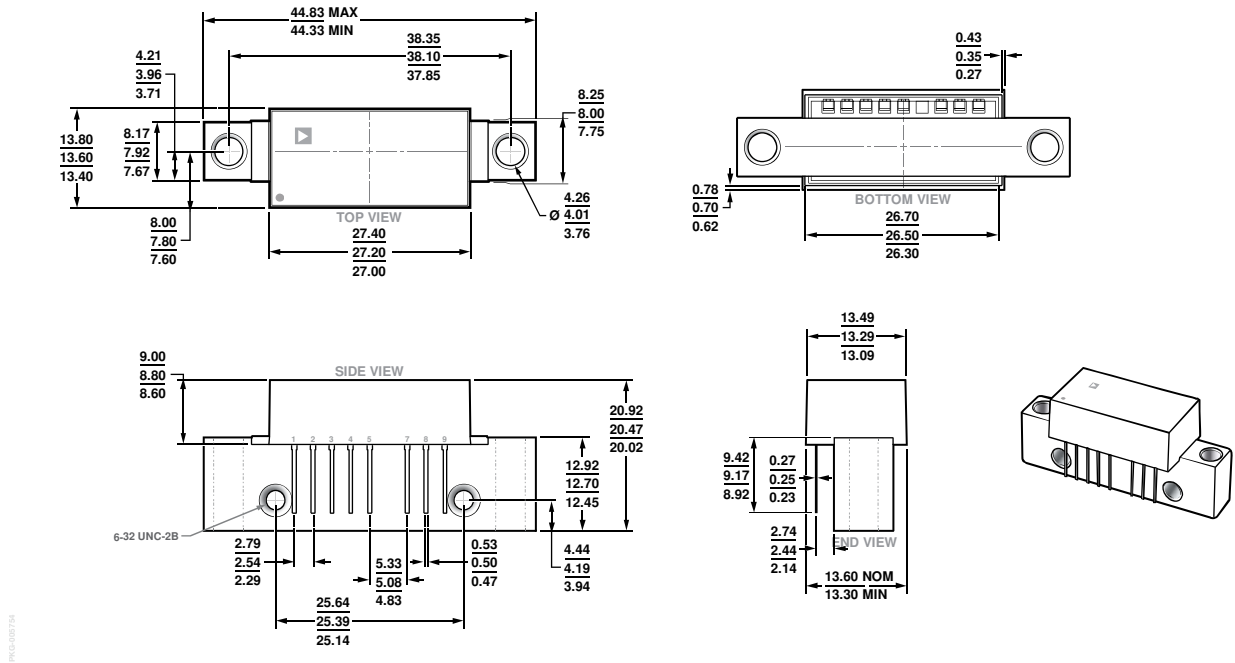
8-Pin SOT115J Module Package [MODULE] (ML-8-1)
